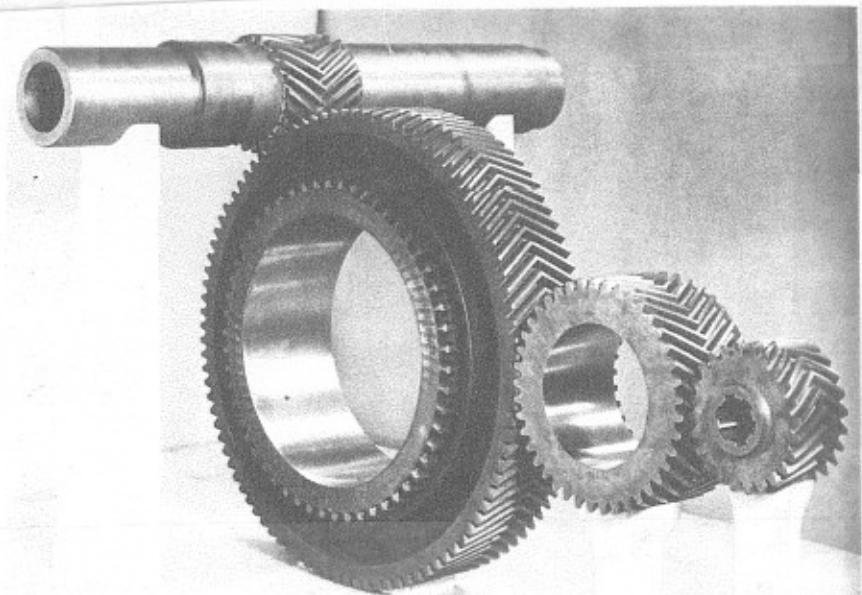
(a) Train of continuous tooth herringbone gears. In the continuous variety of herringbone gears, the teeth are cut up to the center of the gears.
